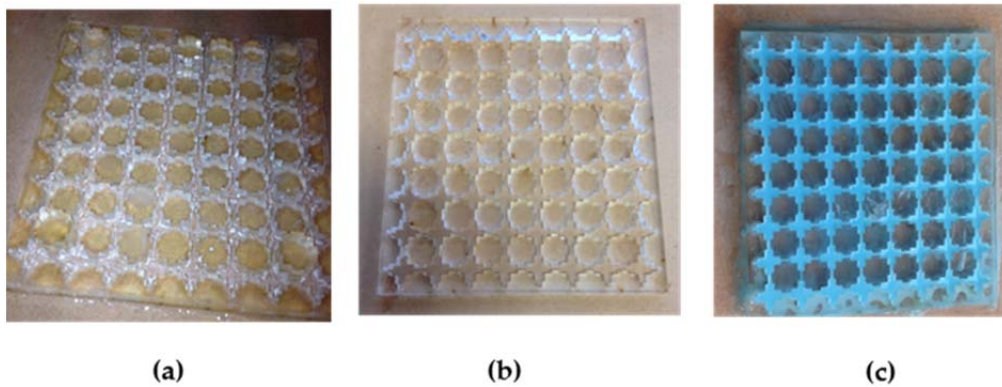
Casting process of liquid plastic base foam; (a) fabrication of 3D printed mold; (b) top view of 3D printed mold; (c) casting the liquid plastic base foam in the mold.
